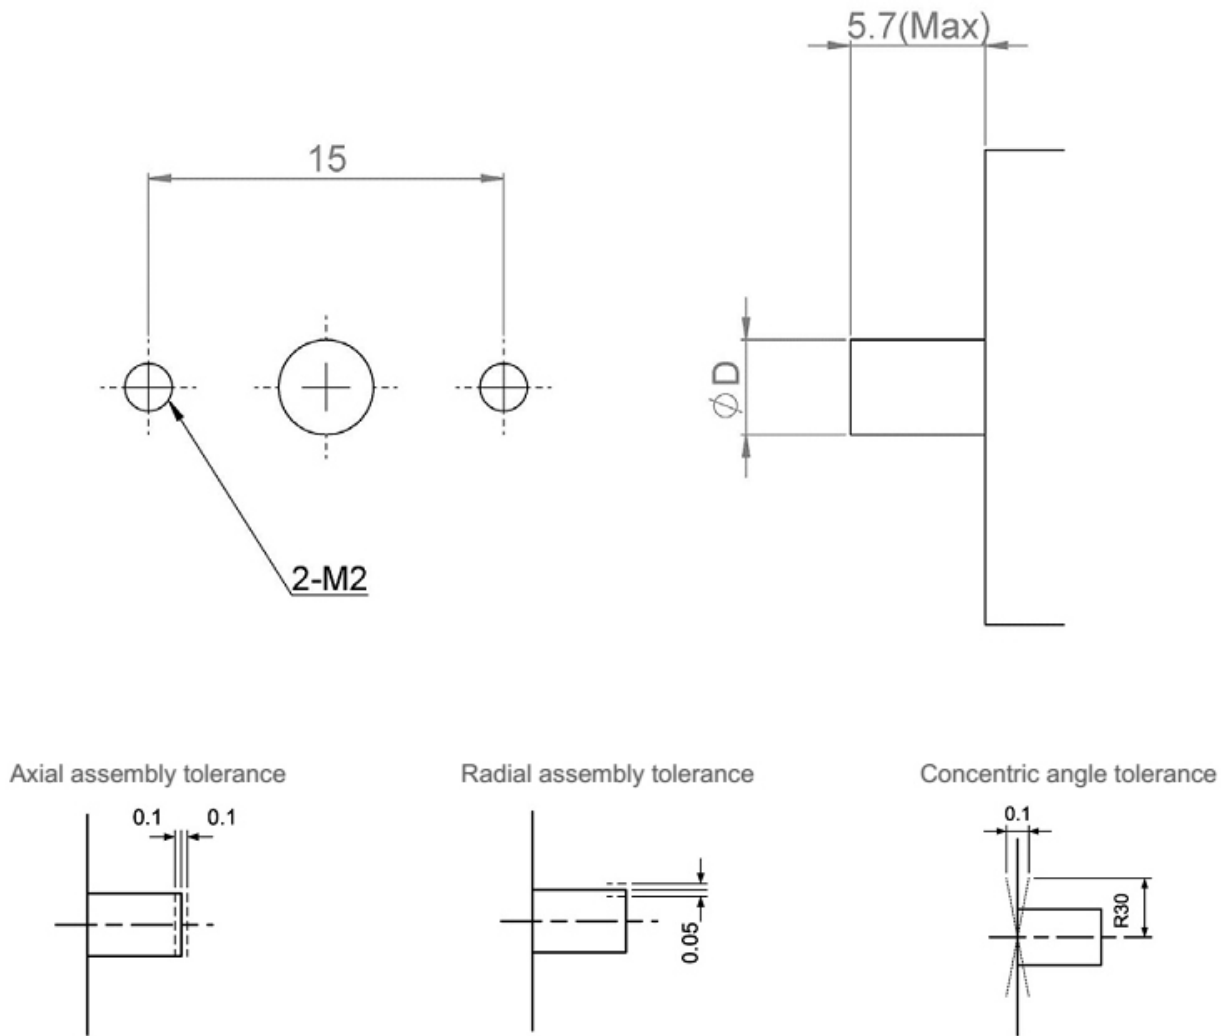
Required dimensions for motor assembly (units = mm) /  $D = 4\text{mm}$
